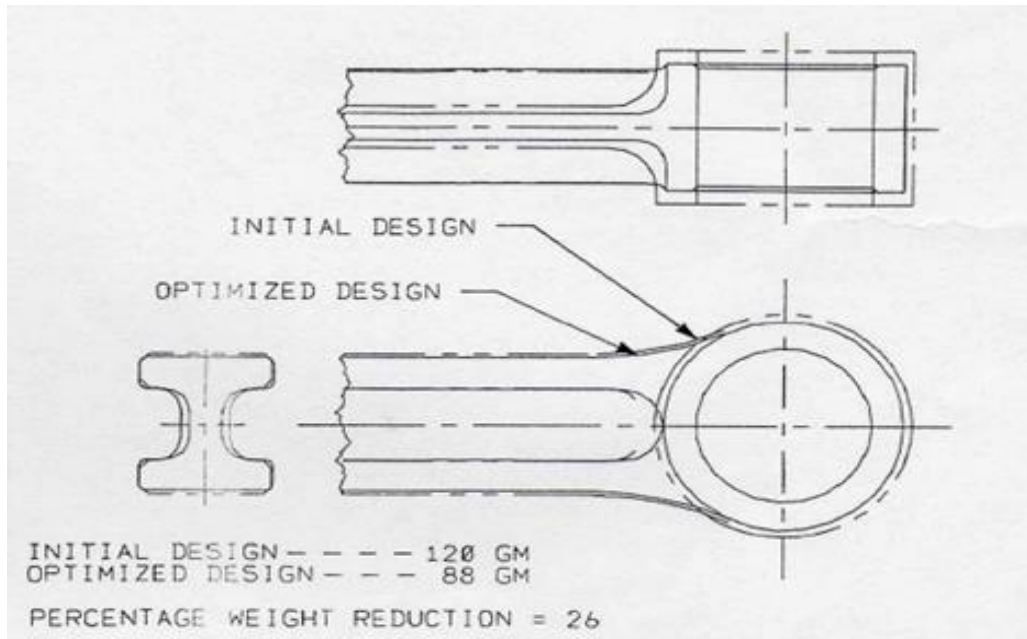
Final and initial designs for the wrist pin end of a connecting rod [21]
